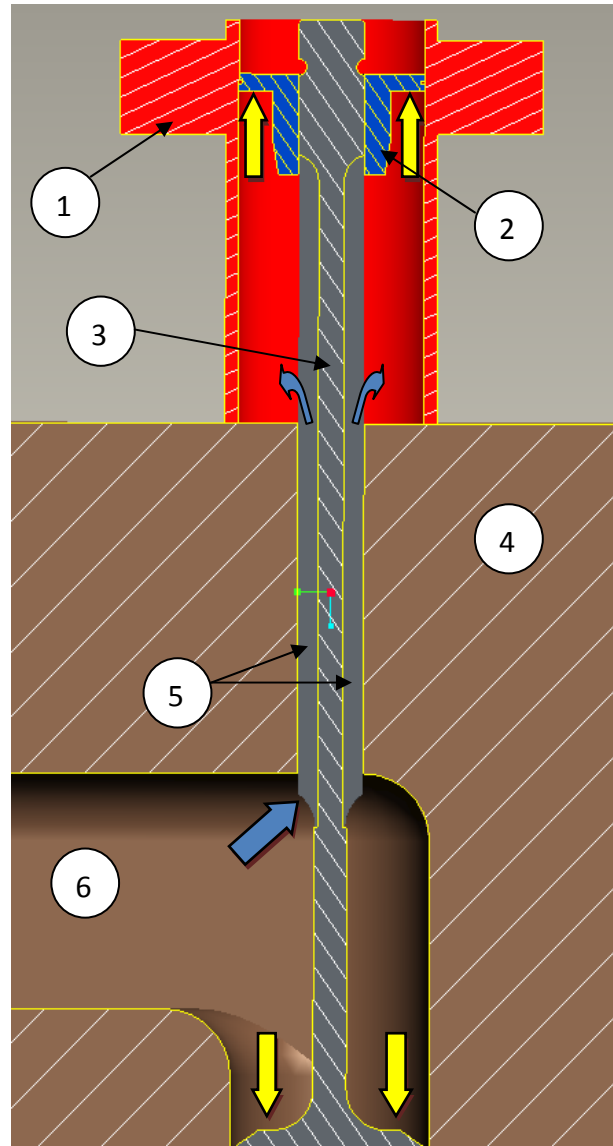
A simple cross section illustration of the pneumatic valve spring arrangement mounted on the cylinder head.
